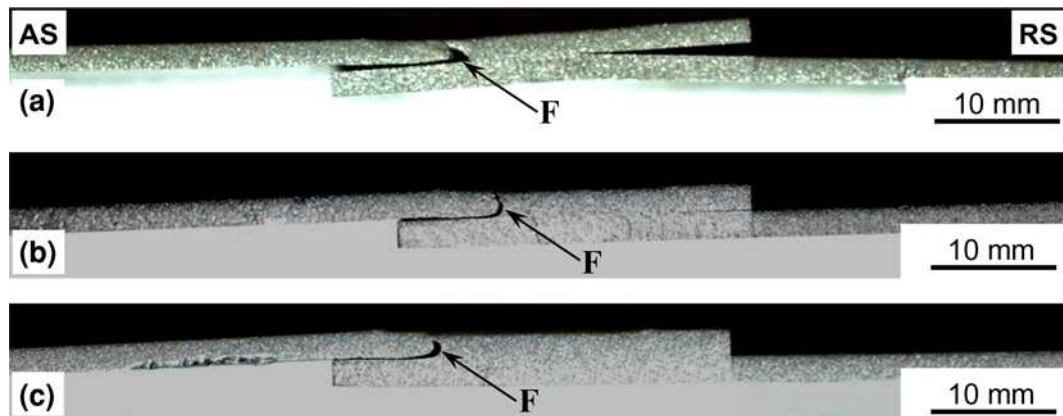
Fatigue failure locations (as indicated by F) in the FSLWed AZ31B-H24 Mg alloy weld joined at the various tool rotational and welding speeds: (a) 1000 rpm, 20 mm/s, (b) 1500 rpm, 20 mm/s, and (c) 1500 rpm, 10 mm/s.
